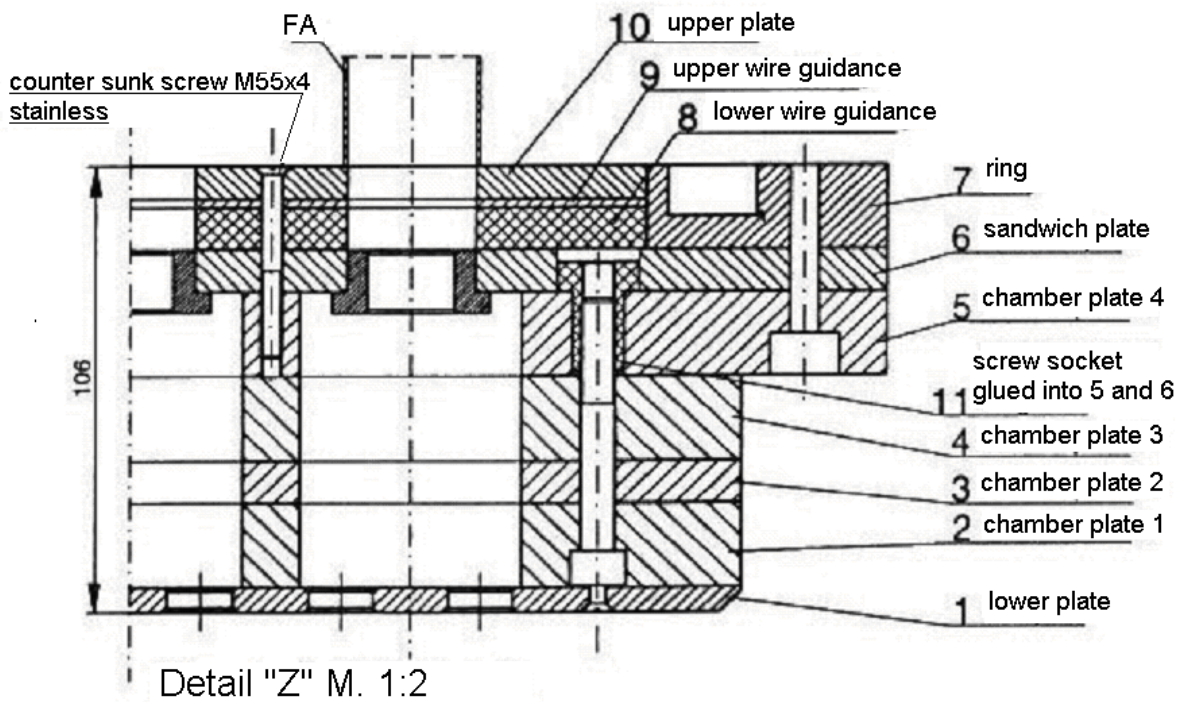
Model of the lower core support plate, Detail: Coolant flow into the fuel assembly
